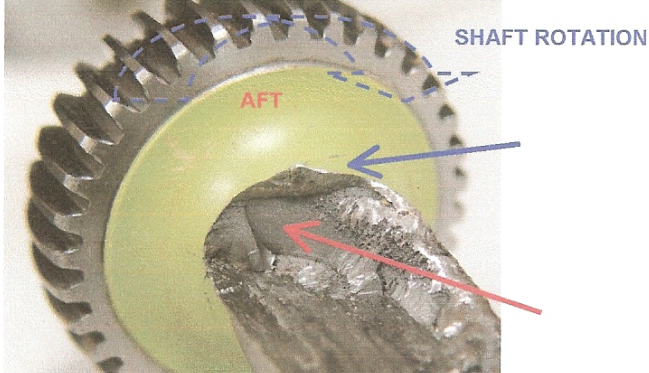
Drive shaft fracture, AFT end (digital)
